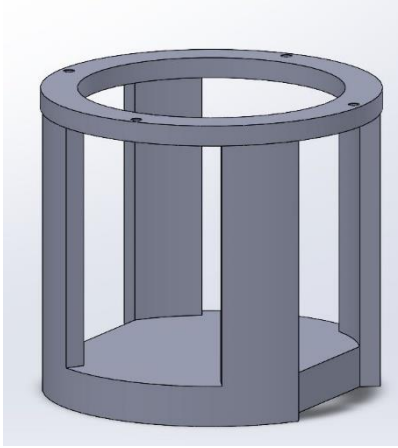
Top internal frame without PCBs, designed to be modular and easily removable.
